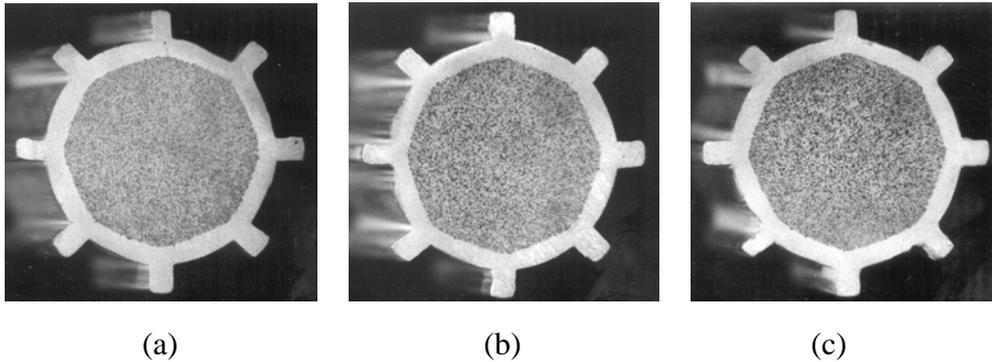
Cross sections observed at the middle section of indirectly co-extruded fuel rod;
